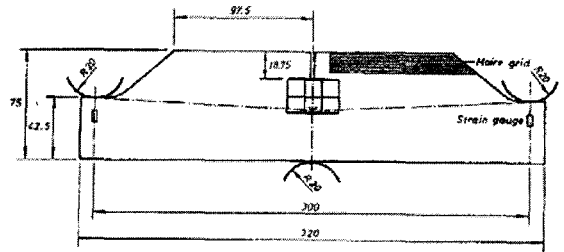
Dimensions of the new designed 3PB specimen. All dimensions are in mm.
